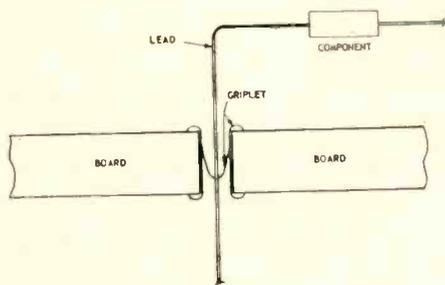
The "Grip-let," similar to an eyelet, has a grip inside holding components during the solder operation at the factory.
